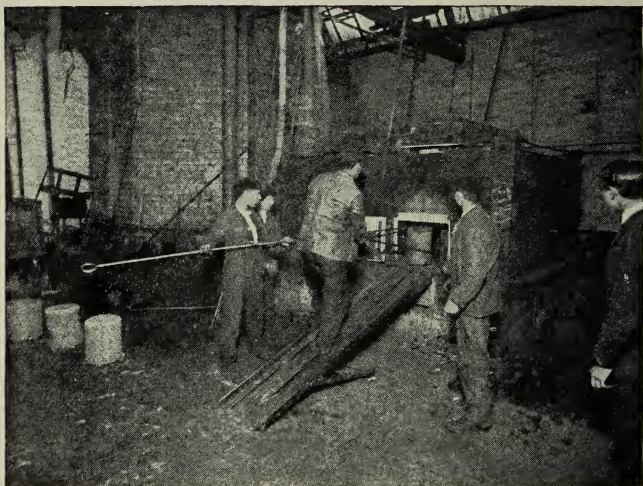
Case-hardening the parts of a Motor. See page 329.
